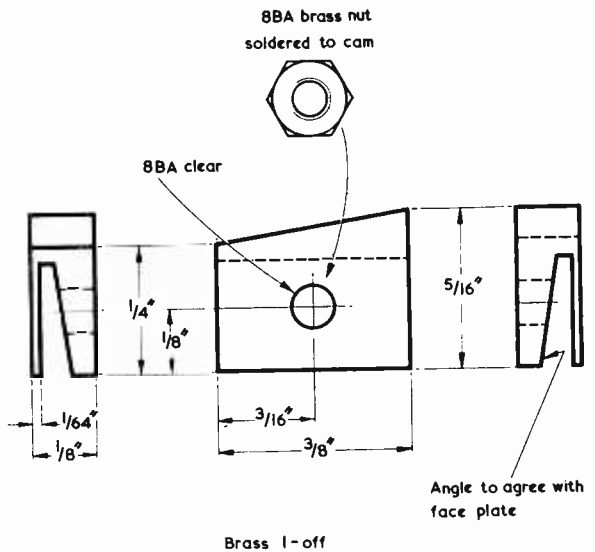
Dimensions of the cam. This is secured to the front disc of the 'Ringer'
